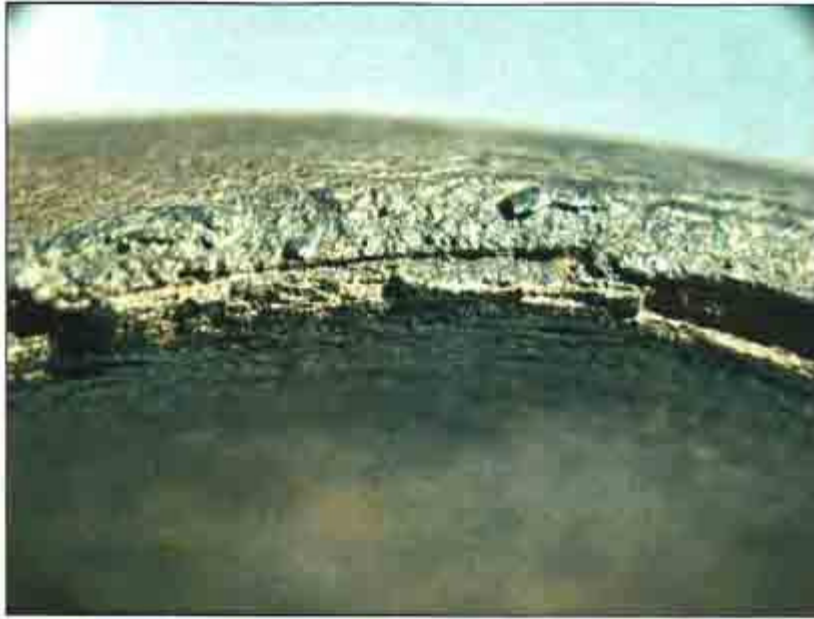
Photograph at 8x showing the thinner walled fracture surface.
